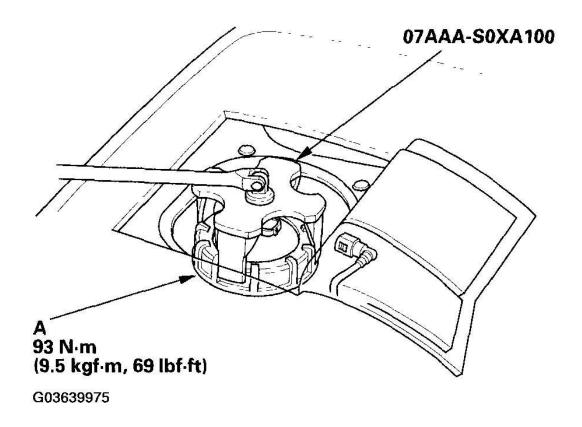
Loosening Fuel Tank Unit Locknut Using Special Tool Courtesy of AMERICAN HONDA MOTOR CO., INC.
